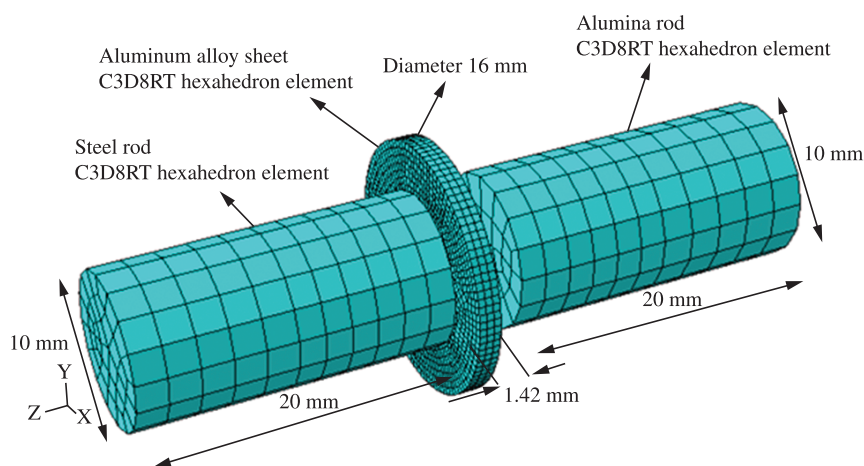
The FEM model and dimension of the workpieces assembly of friction welding process in Abaqus 6.8.
